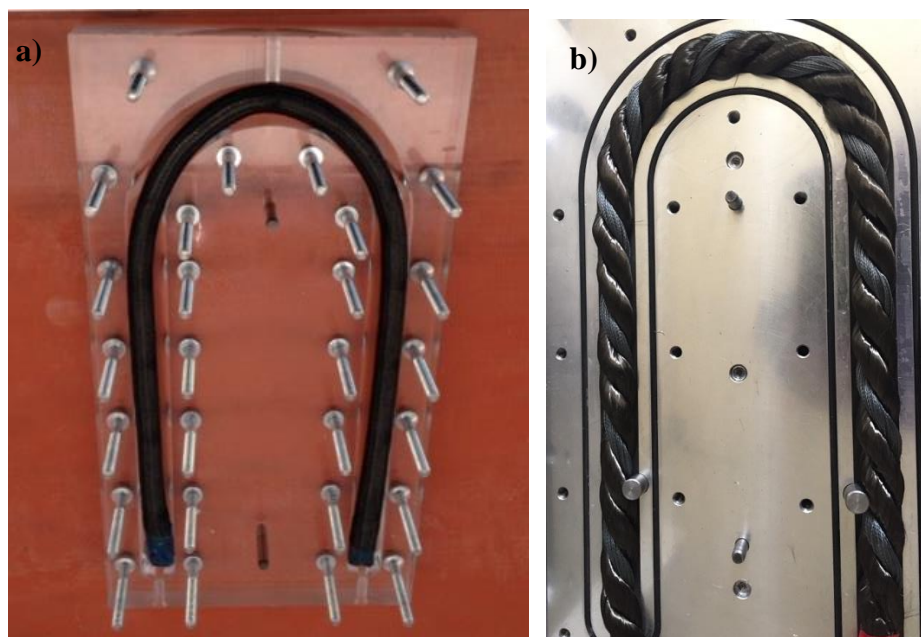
Shackle preform inside the: a) Perspex mould, b) metal mould
